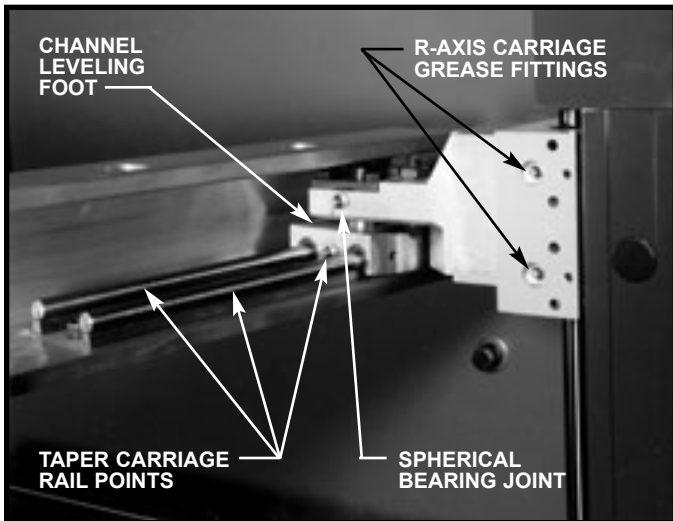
CNC Heavy Duty Backgage Power R-axis
